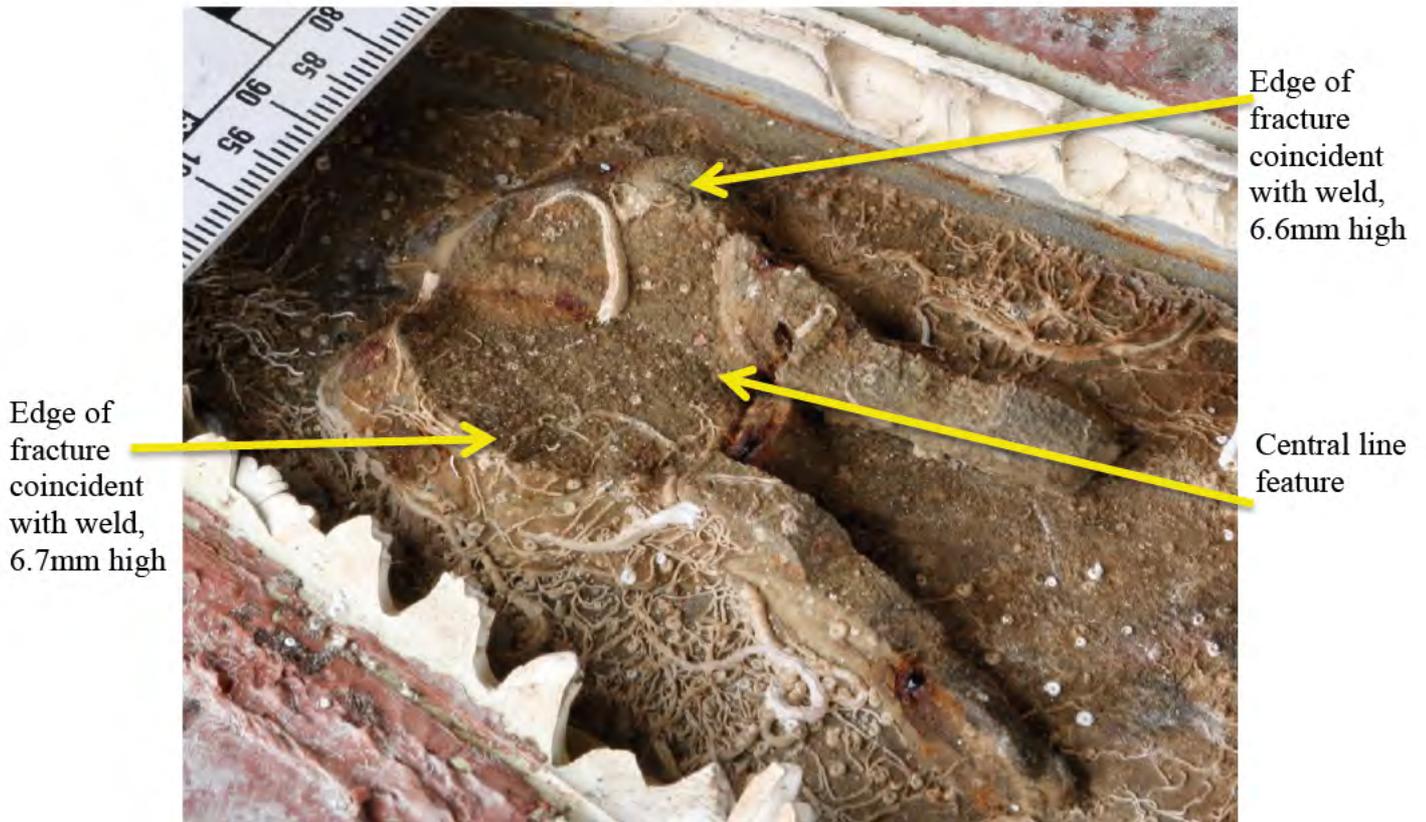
Showing an oblique view of the fracture surface of Rod 12, note the symmetrical features, similar to those of Rod 1.
